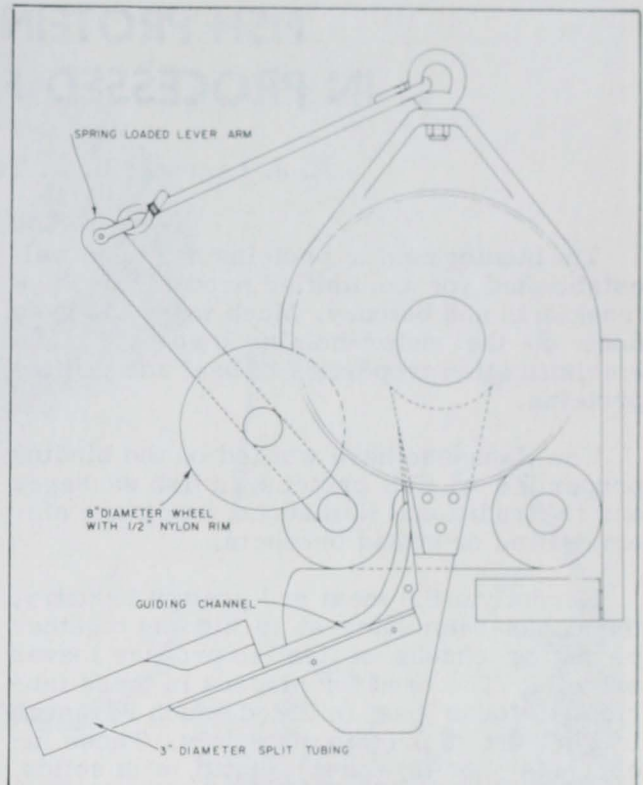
Crab block with spring-loaded wheel to hold line in the sheave.
